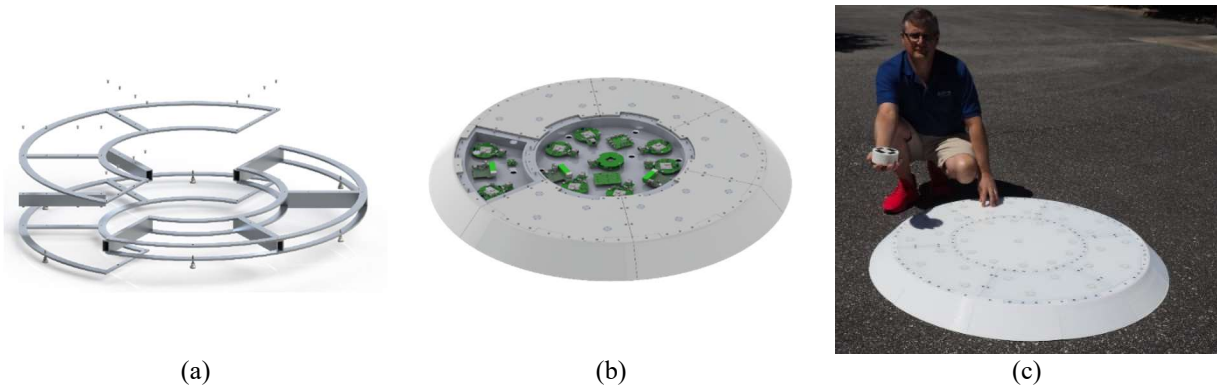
(a) Central plate frame exploded view. (b) central plate partial exploded view. (c) central plate with satellite node.
